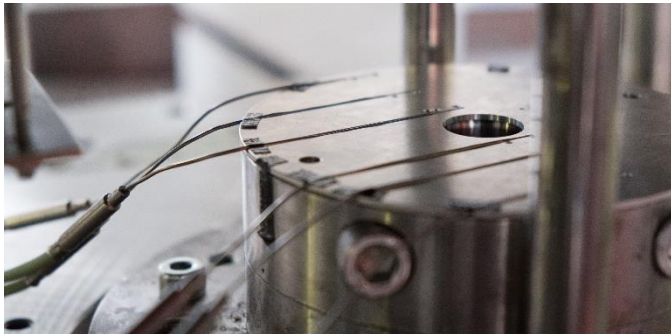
Test setup for the investigation of collar drawing with local contact heating of the sheet
